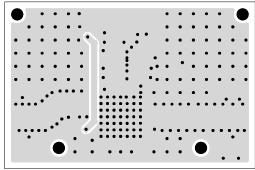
SKY65386-11 Evaluation Board Assembly Drawing
